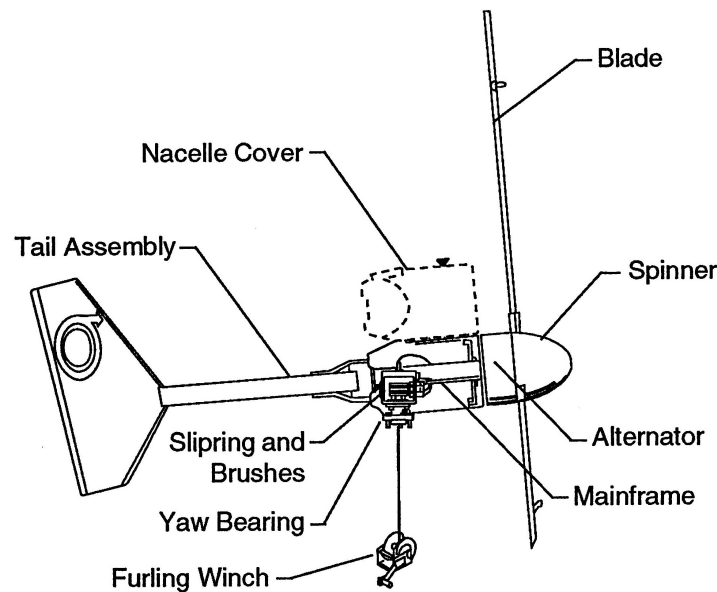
Small Scale Direct-drive Wind Turbine System. Turbine blades are directly coupled to the generator's rotor so that a gearbox is not needed. Figure taken from Ref. [22].
